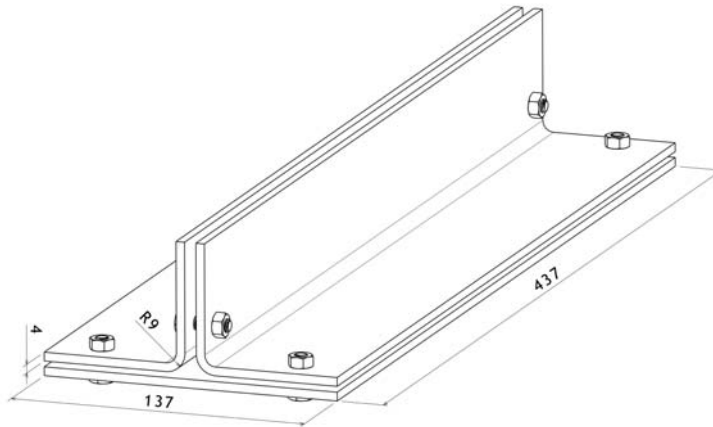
Dimensions of the stiffener's tool (values in mm).
